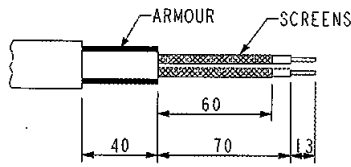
CABLE MAKE OFF AND ASSEMBLY DETAILS OF TYPE A39PI I.P.C. CONNECTOR
